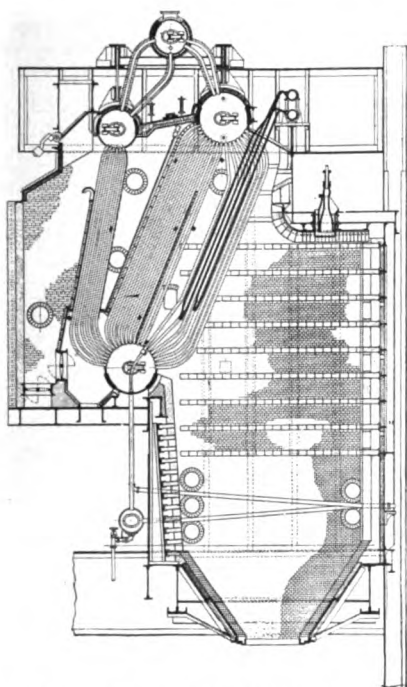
Showing arrangement of Elesco superheater in the first bank of boiler tubes.
